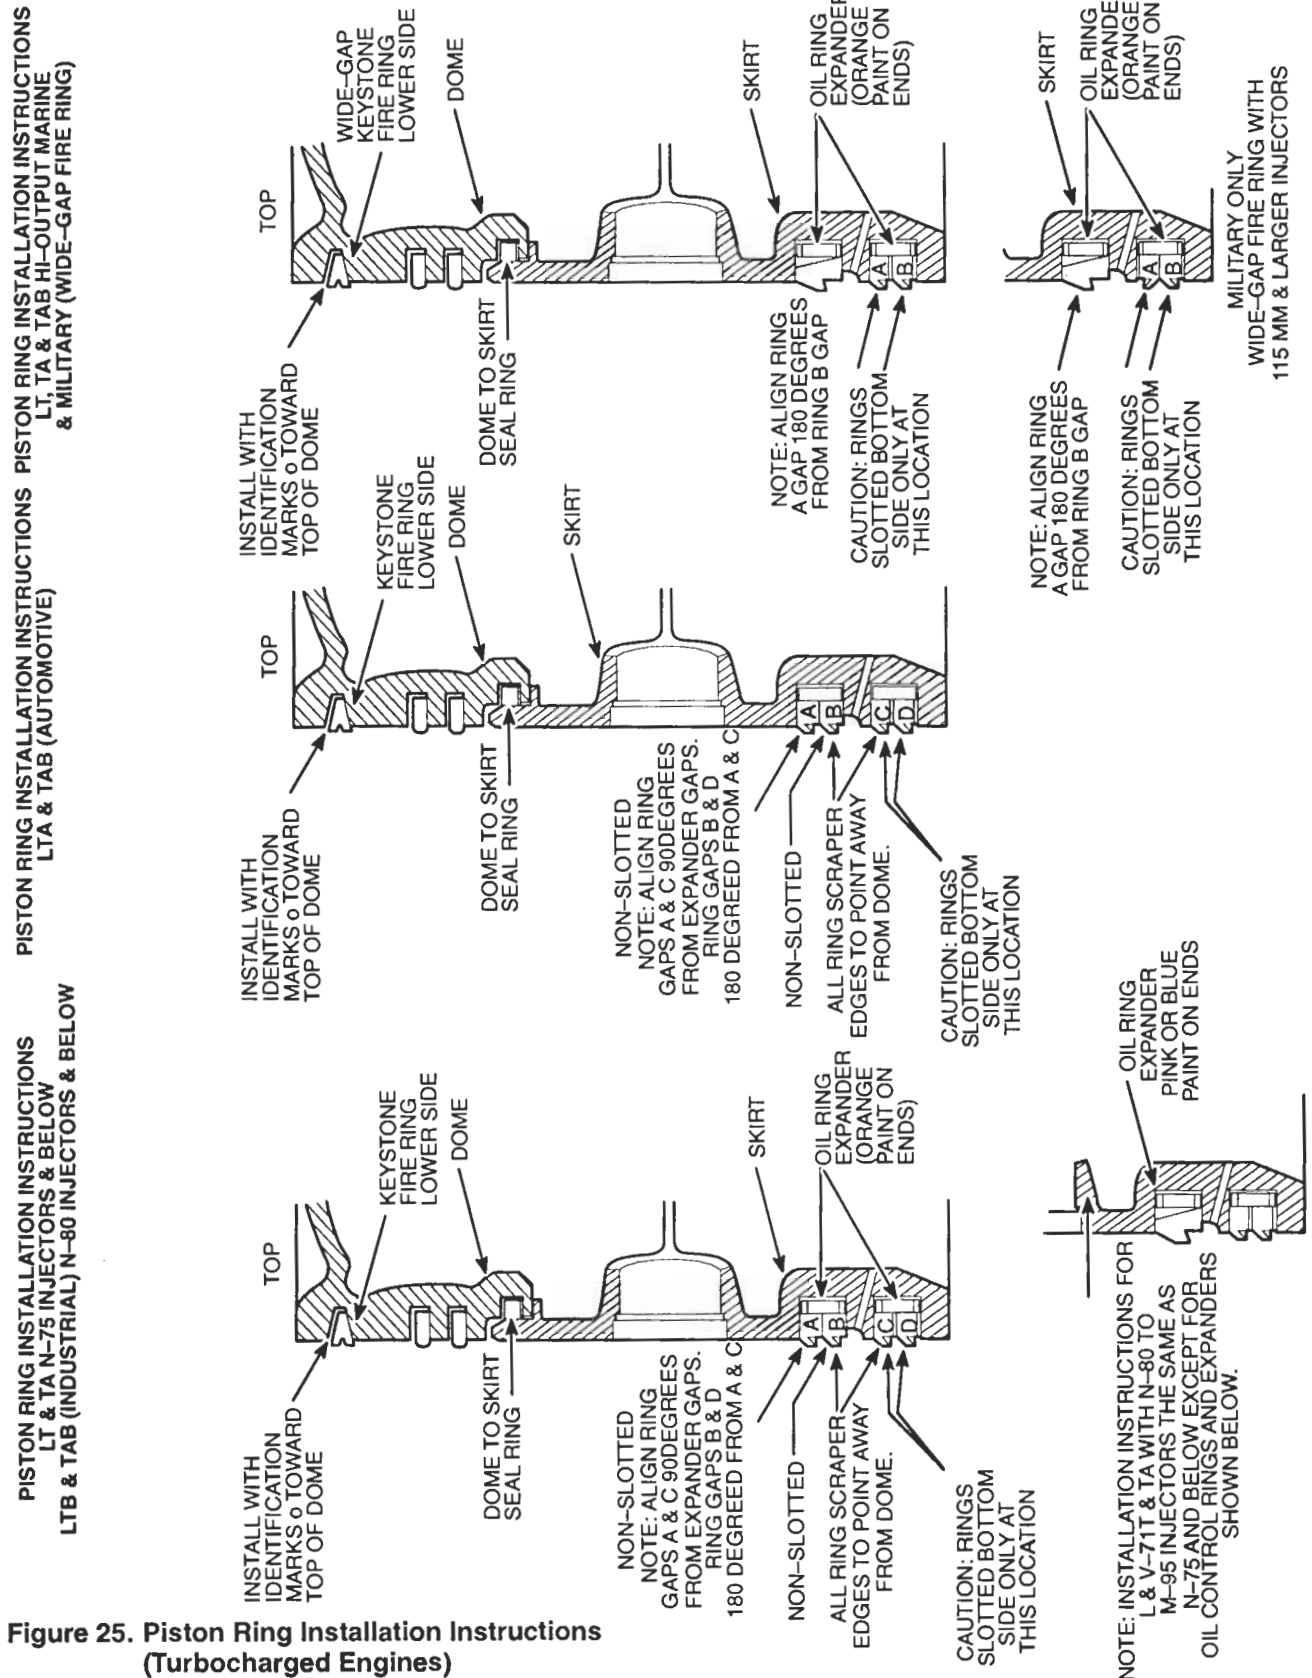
Piston Ring Installation Instructions (Turbocharged Engines)
